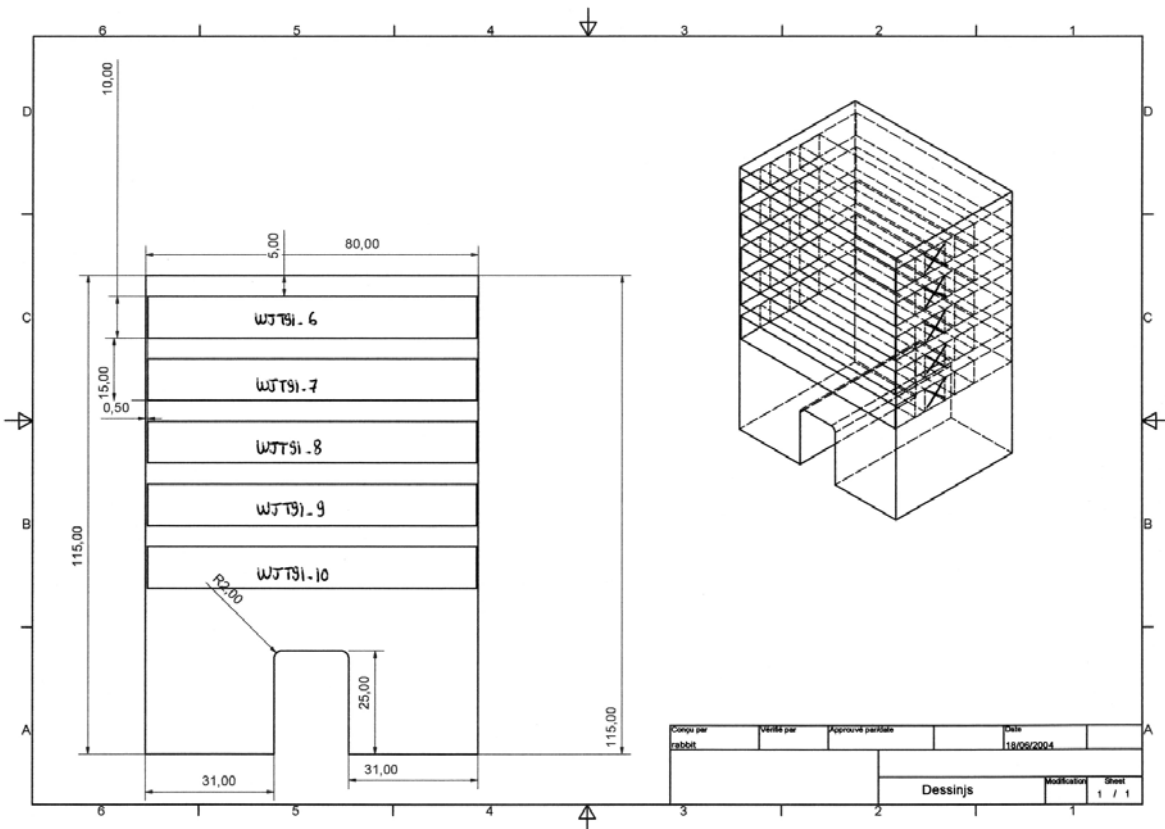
Location of creep test specimens in the WJT91 weldment (2)
